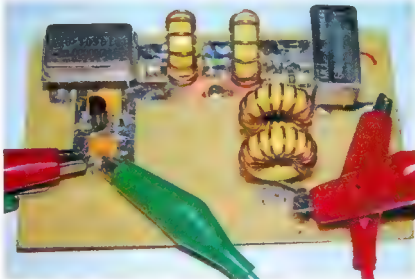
Finished project with test gear clips – note lifting of narrow track at the bottom of the photograph
